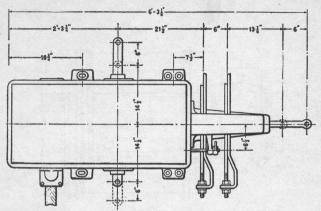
Dimensions of Model 4 Switch Machine for Movable Point Frog or Double Slip Switch
